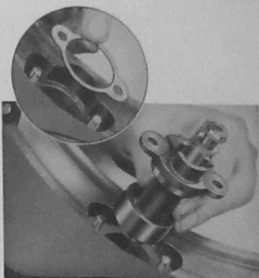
Installing Gasket and Cylinder Assembly Into Housing
